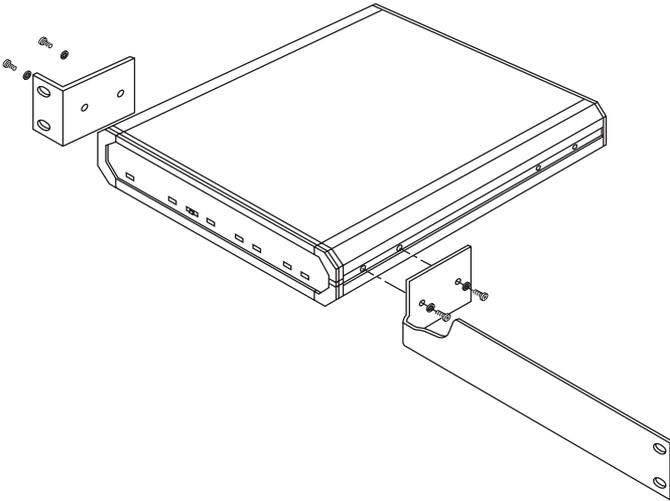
Putting together the rackmount assembly for a single FOLD.
